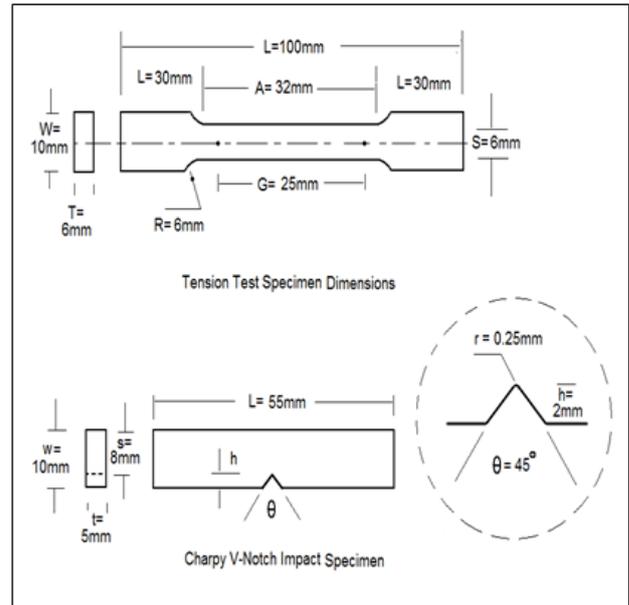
Dimensions of tension and impact test specimen according to ASTM code
